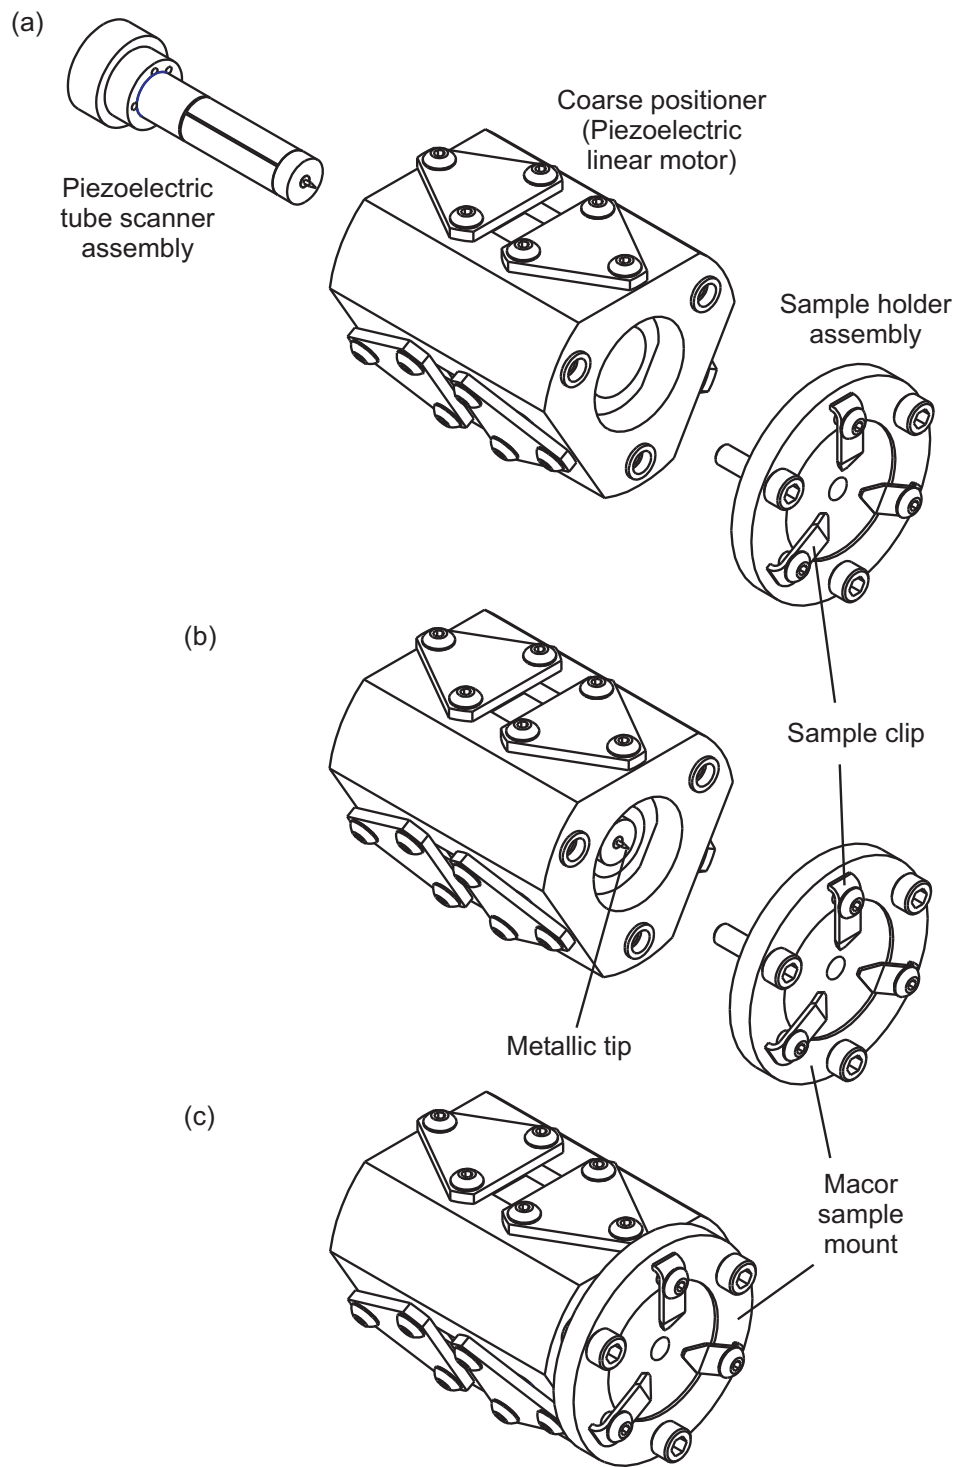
Assembly of the instrument: (a) exploded view, (b) exploded view with the piezoelectric tube scanner assembly mounted, and (c) unexploded of the instrument assembly.
